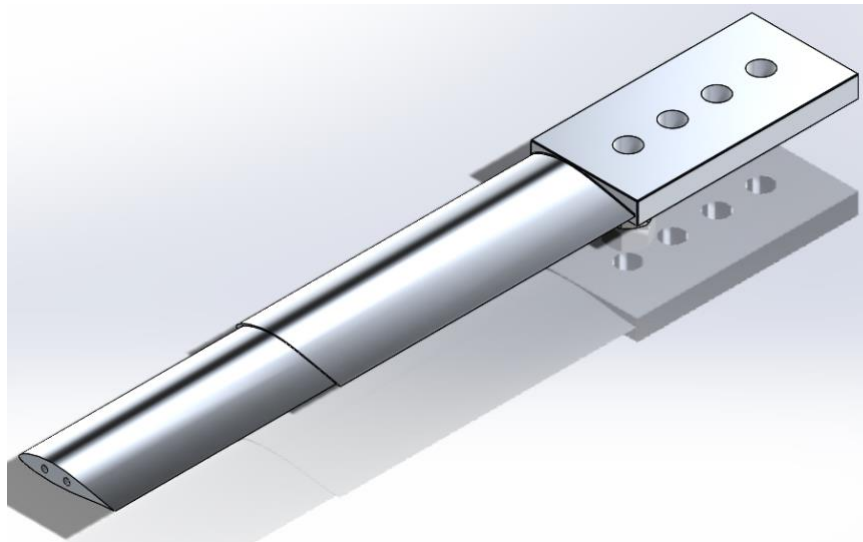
DU 96-W-180 6061 aluminum airfoil blade
